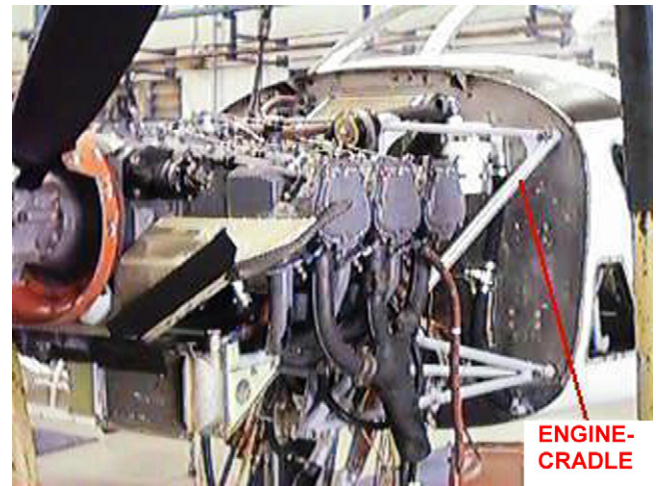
Engine-cradle assembly in a Brazilian T-25 Universal aircraft.
